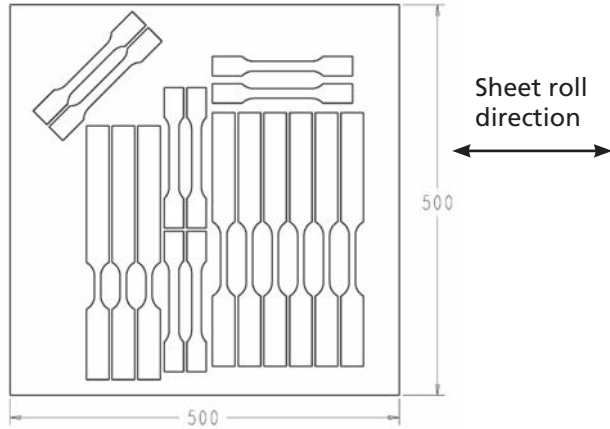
Packaging and orientation of specimens to be produced from sheet (dimensions in mm)
